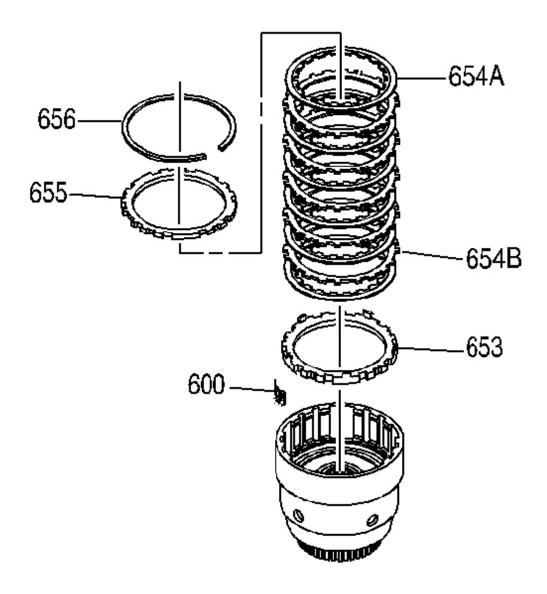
Locating 3rd & 4th Clutch Backing Plate Retainer Ring Courtesy of GENERAL MOTORS CORP.
